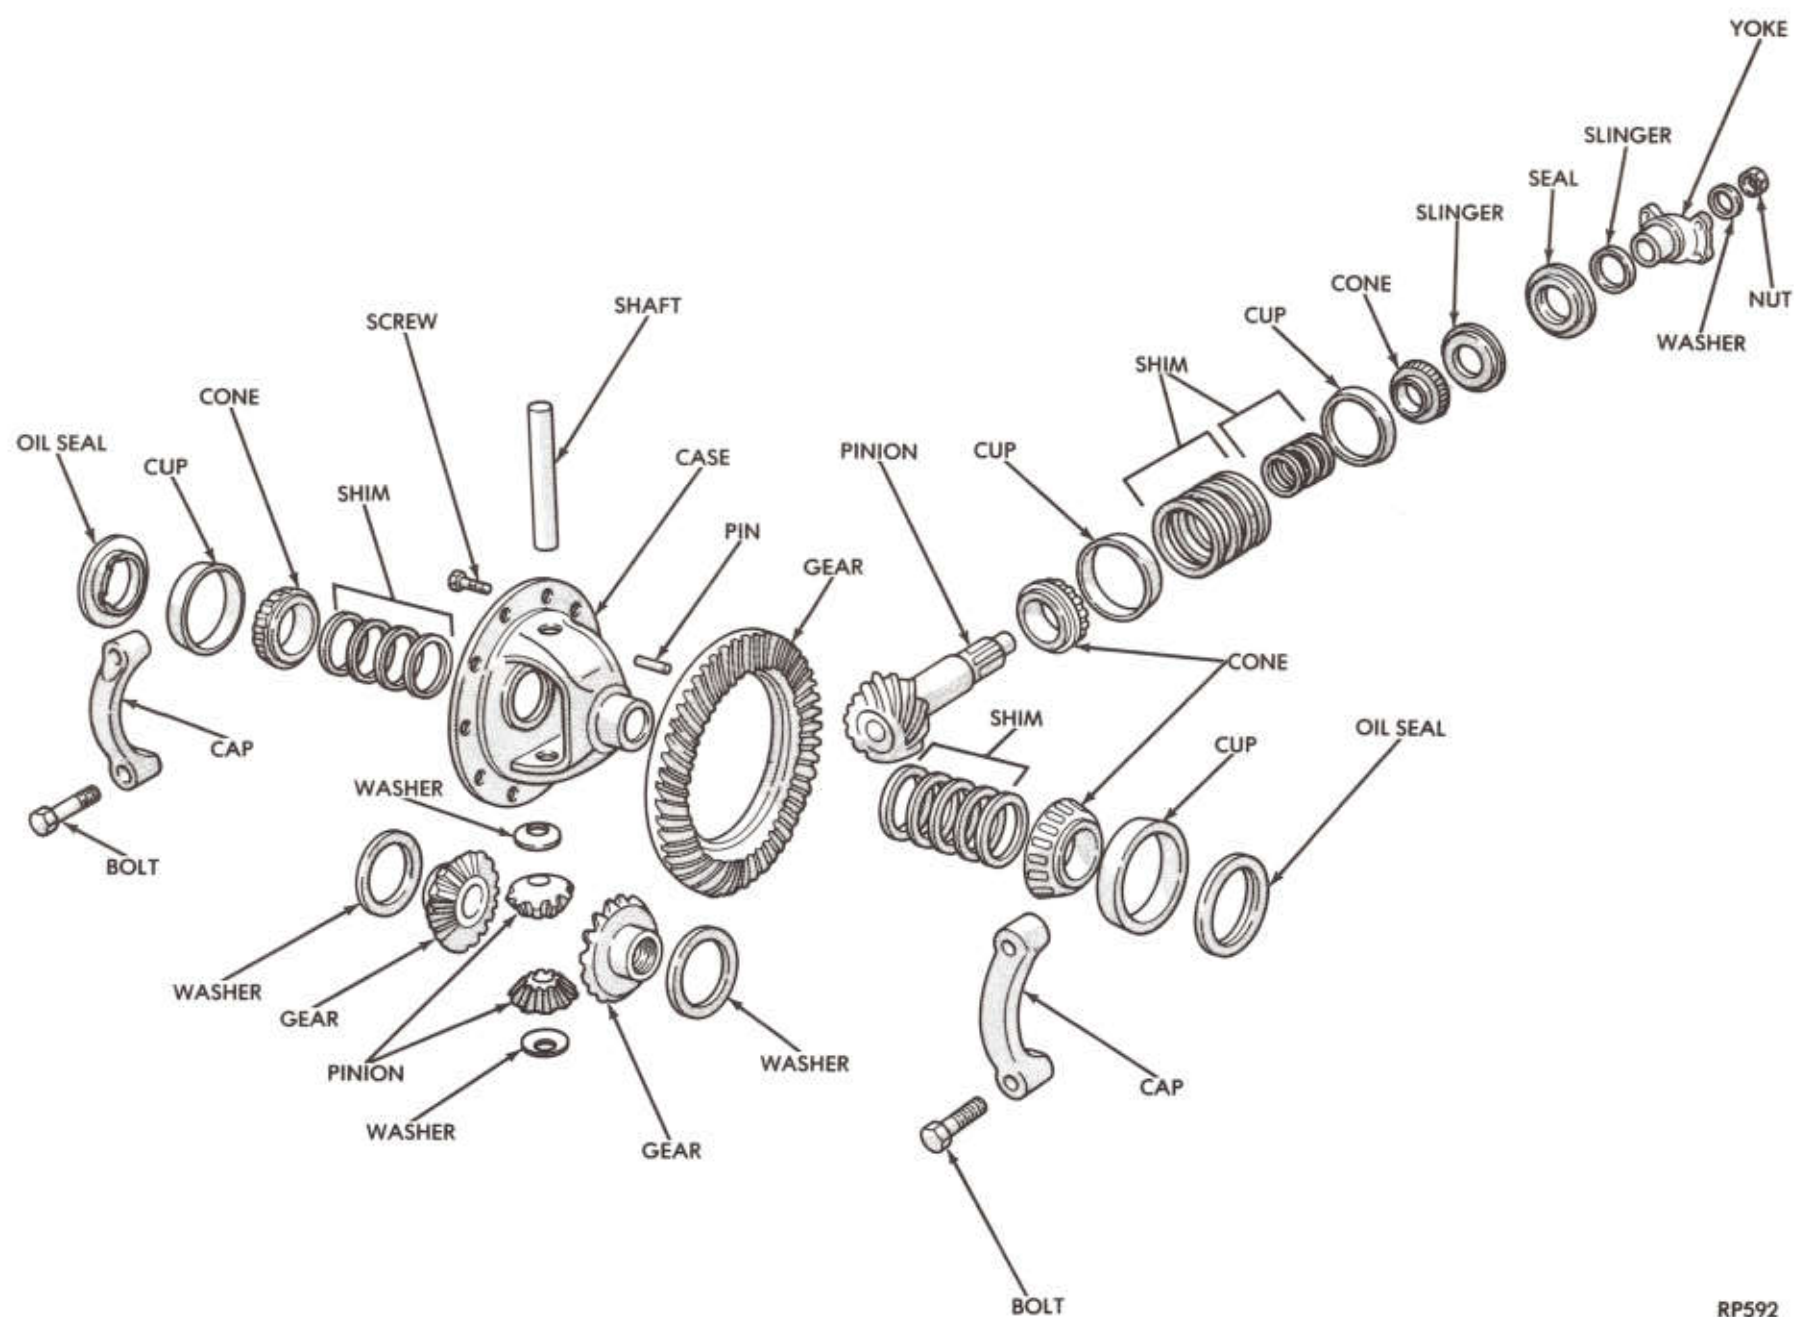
Differential Assembly (60 and 60M Model Axles)
